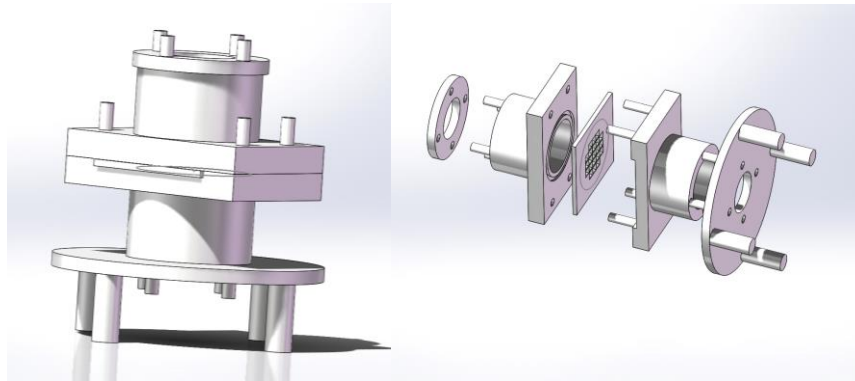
Packaging and assembly prototype of the MET based micro seismometer.
